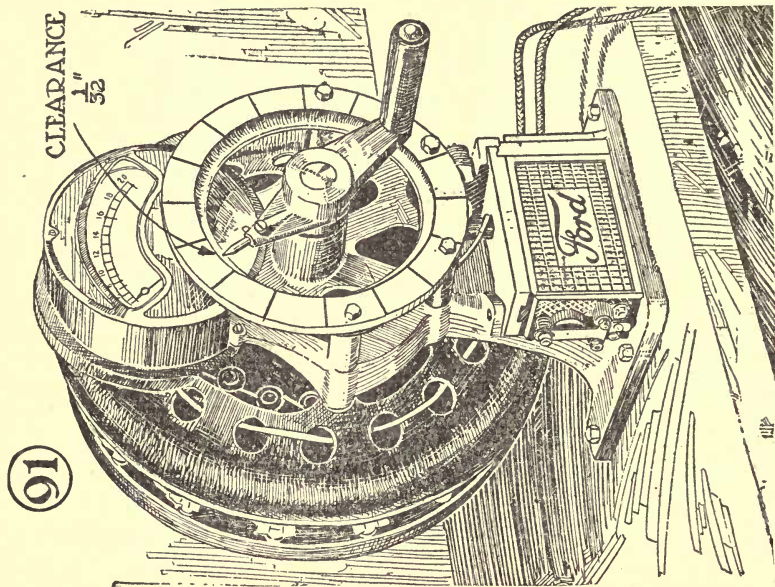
This coil-unit testing machine is used for testing the units and adjusting the vibrators to the best possible position
